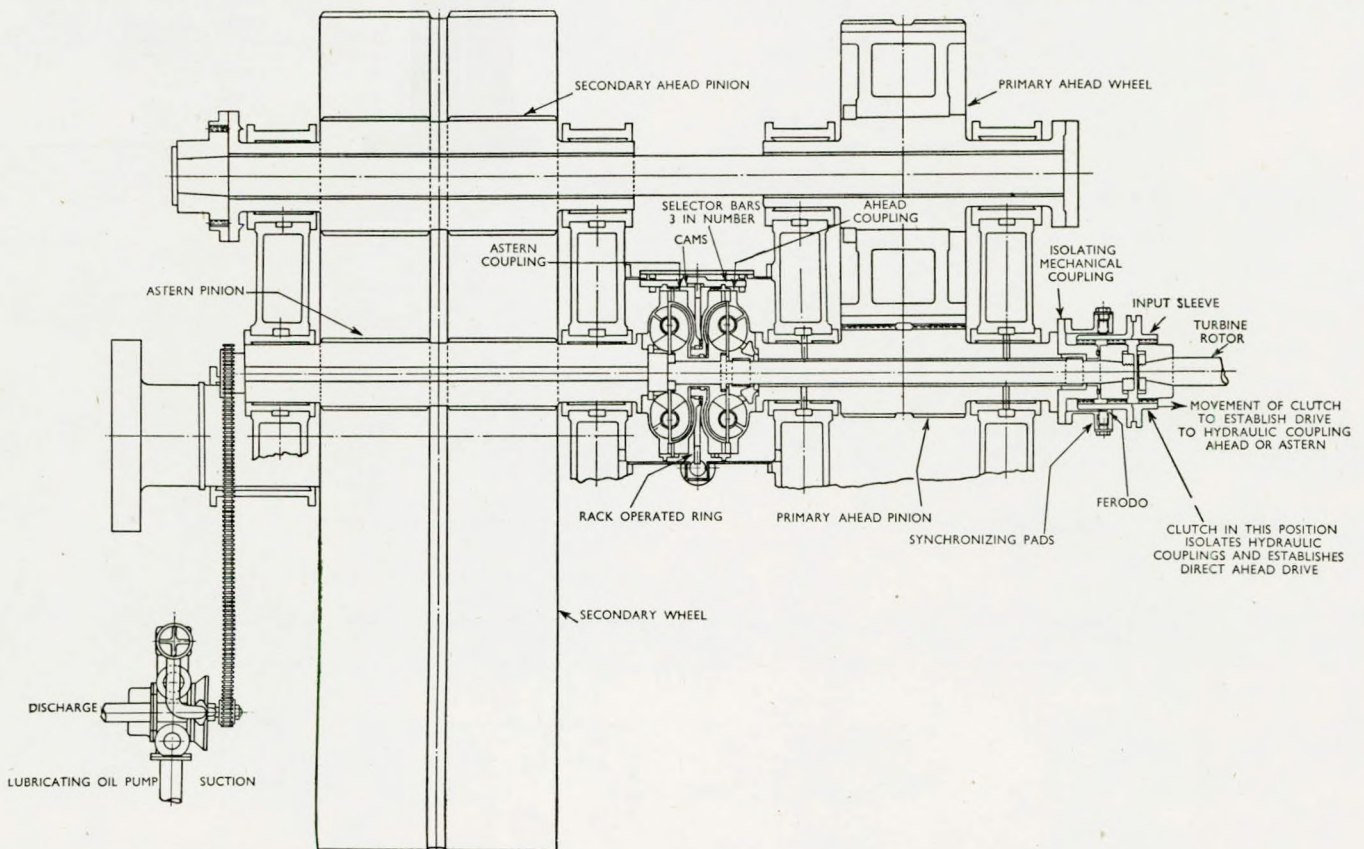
Gear with double reduction ahead drive and single reduction astern drive
